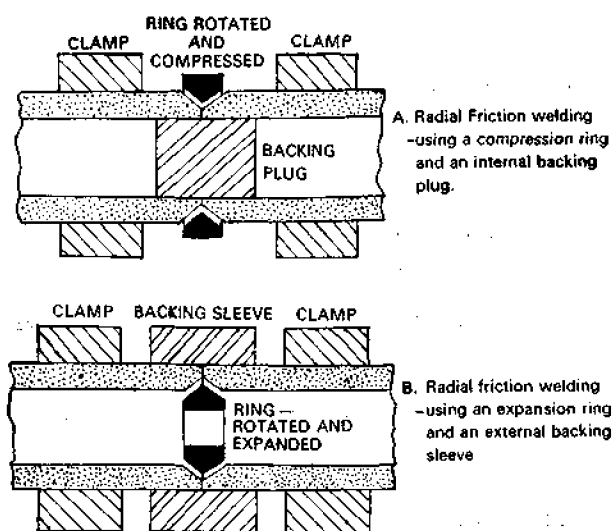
Schematic arrangements for Radial friction welding.
